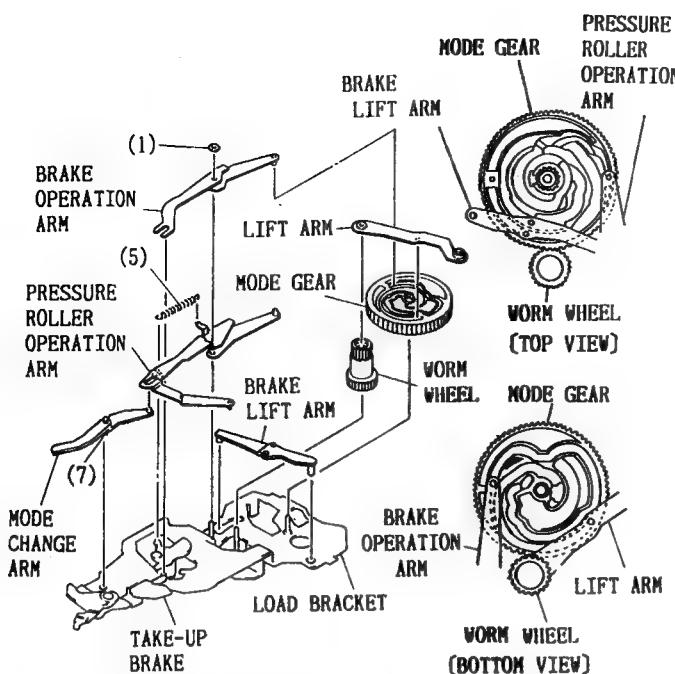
Brake Operation Arm, Mode Gear, Worm Wheel, Pressure Roller Operation Arm, Mode Change Arm and Brake Lift Arm
